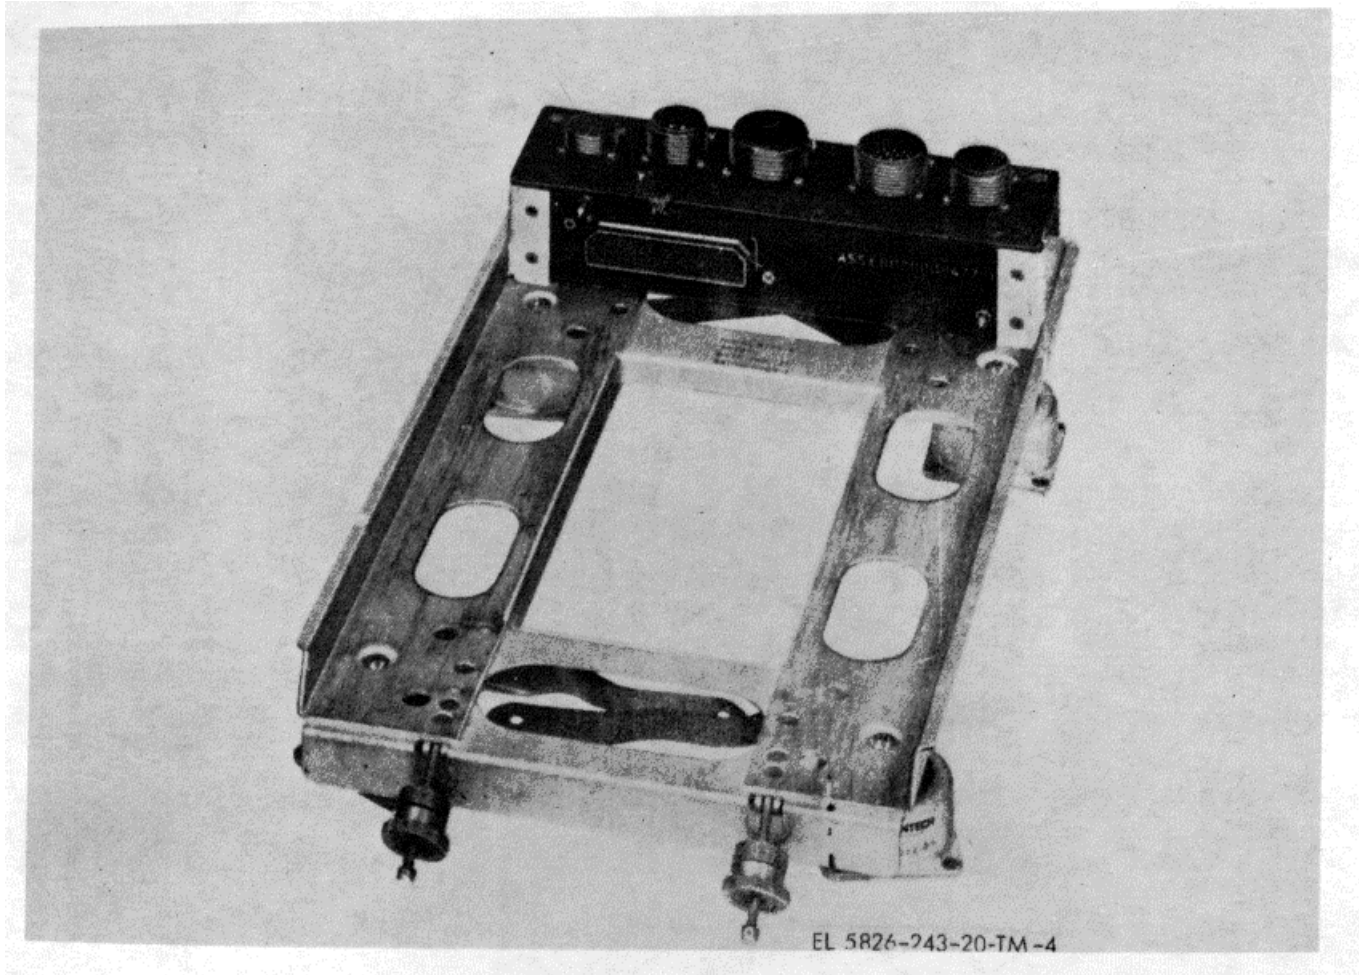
Base. Shock Mount. Electrical Equipment MT-4411/ARN-103(V).
